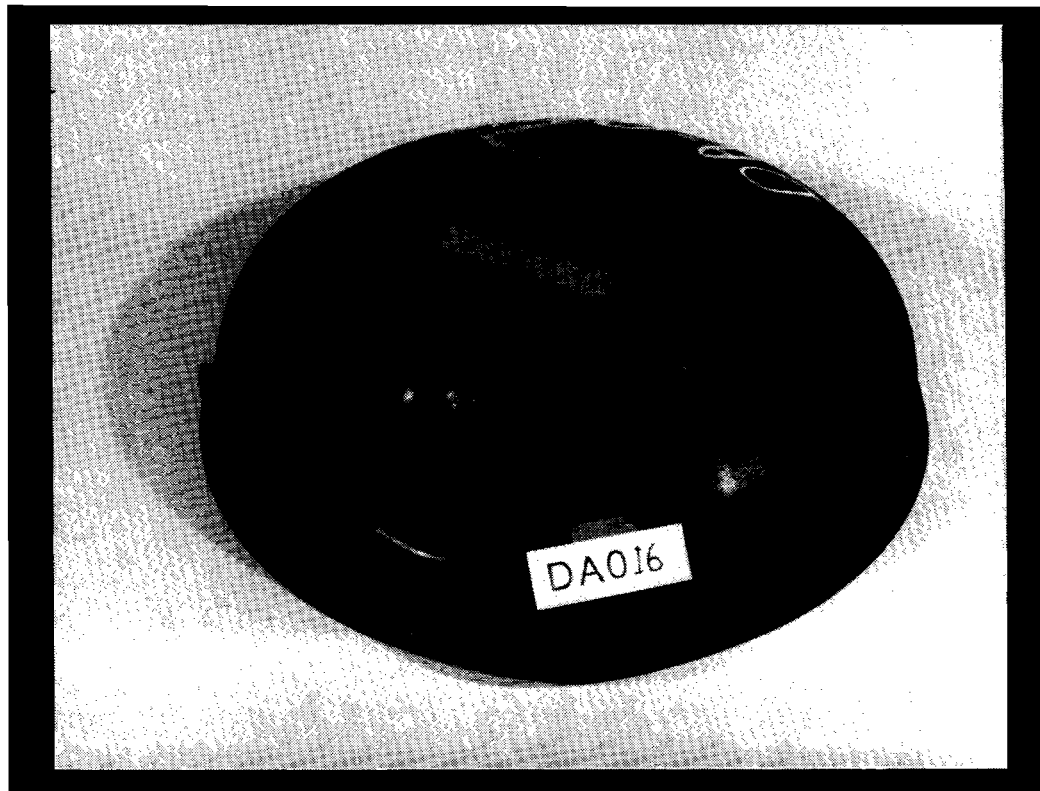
TYPICAL PUNCTURE OF A 105 STEEL HEAD - NOTE PERIMETER WELDS FOR BOLT ATTACHMENTS, USED FOR 100 PSI TESTS.
